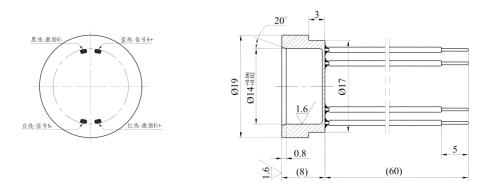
Dimension of gauge pressure and lead definition(Bottom seal)
